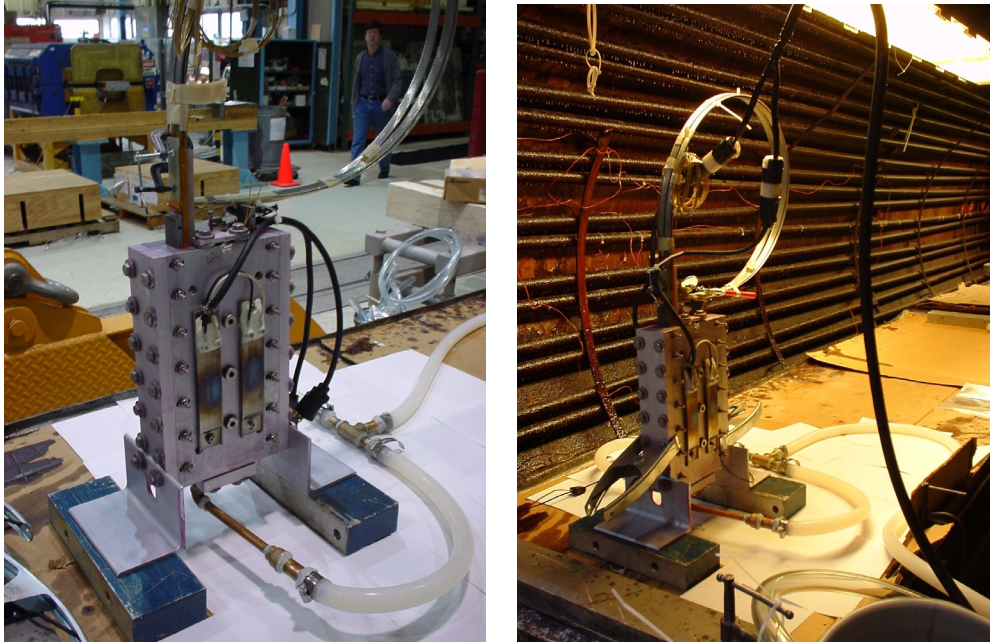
,46. Assembled impregnation fixture and fixture connections inside a vacuum oven in IB2.
